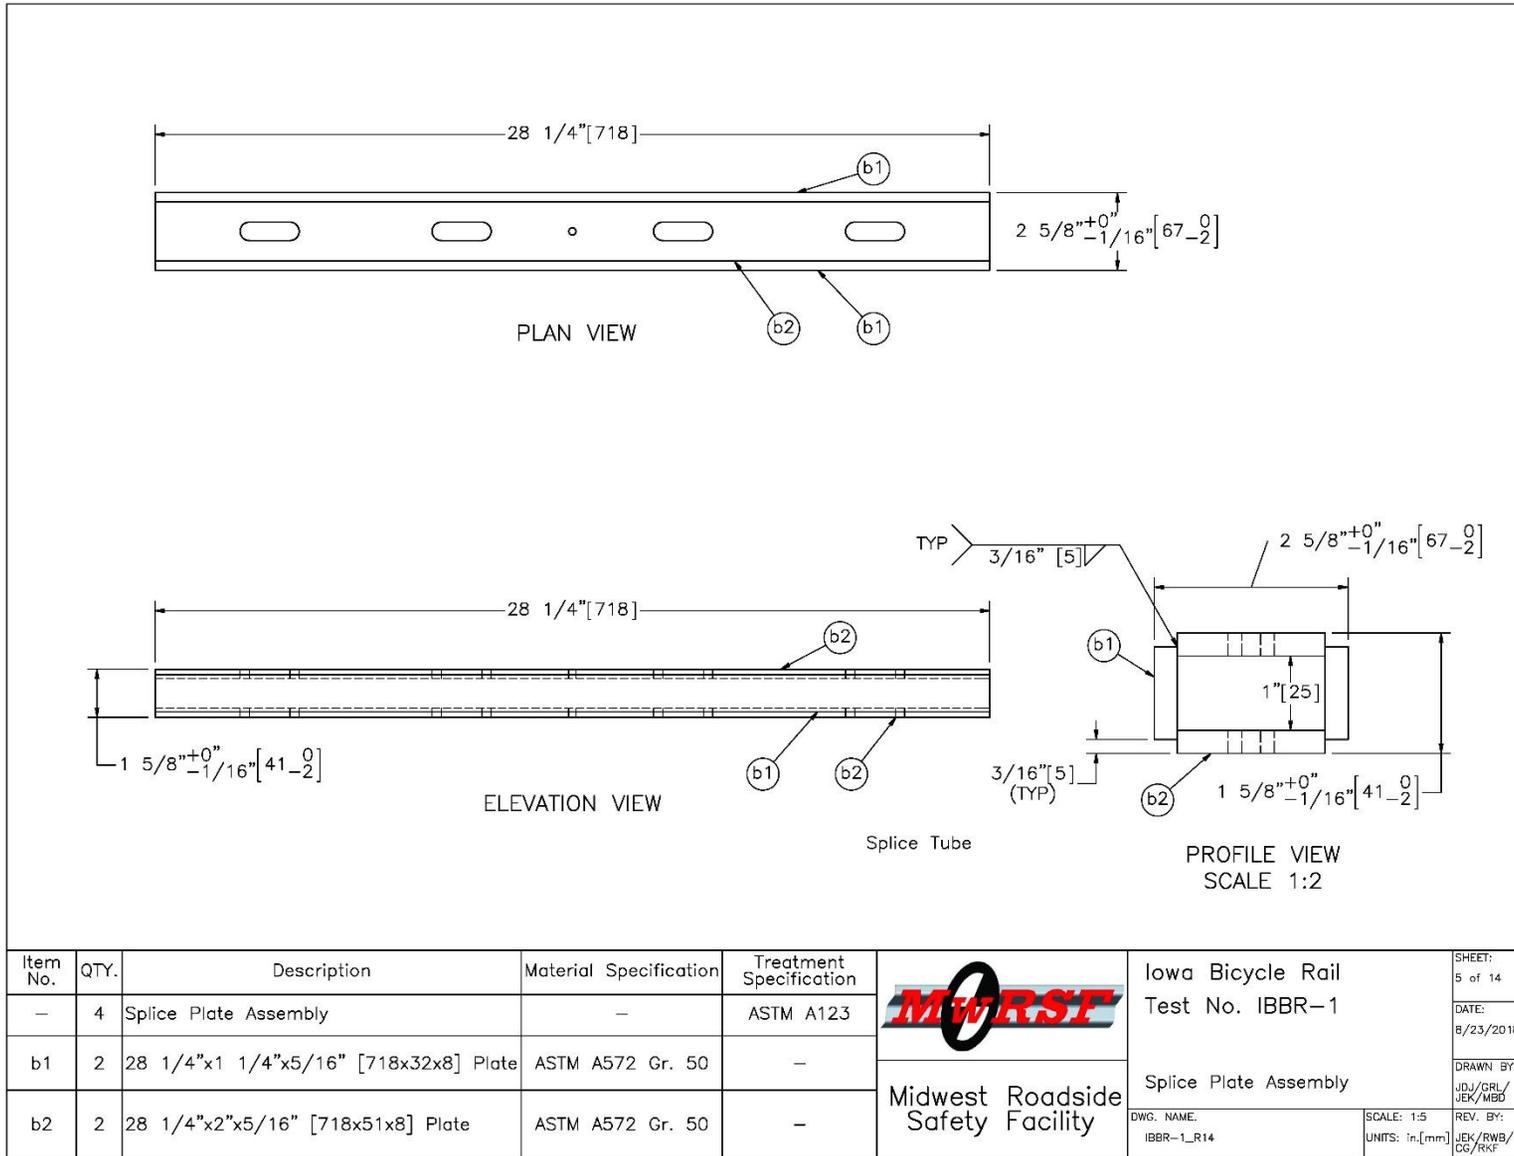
Splice Plate Assembly, Test No. IBBR-1
